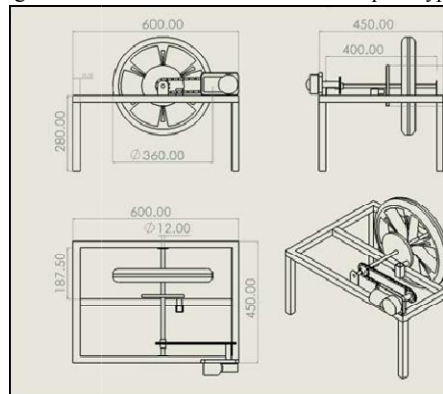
2D orthographic drafting of the prototype with key dimensions (mm).
